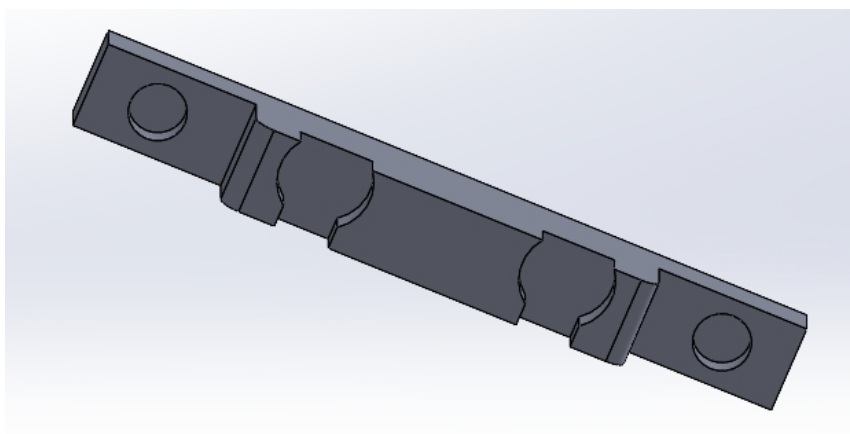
PDMS chip on a coverslip holder with sensor holder slots.
